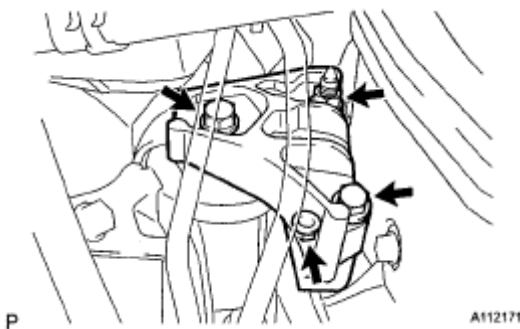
Identifying Engine Mounting Insulator RH Bolts And Nuts
